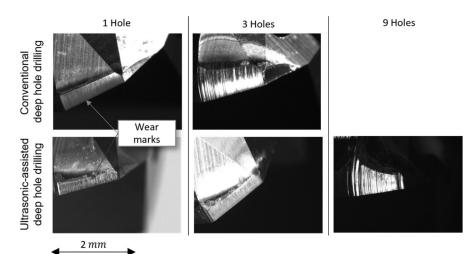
Tool condition of conventional and ultrasonic-assisted deep hole drilling
